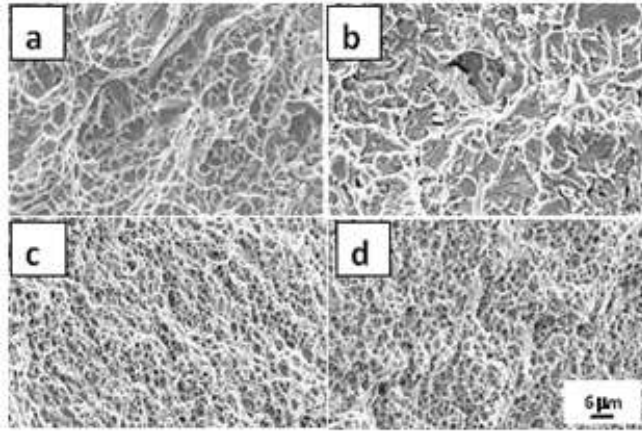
Fracture features of impact samples of EB welds in various heat treated conditions (a) as-weld (b) HT/T400 (c) HT/T600 (d) H/T(670+600)
